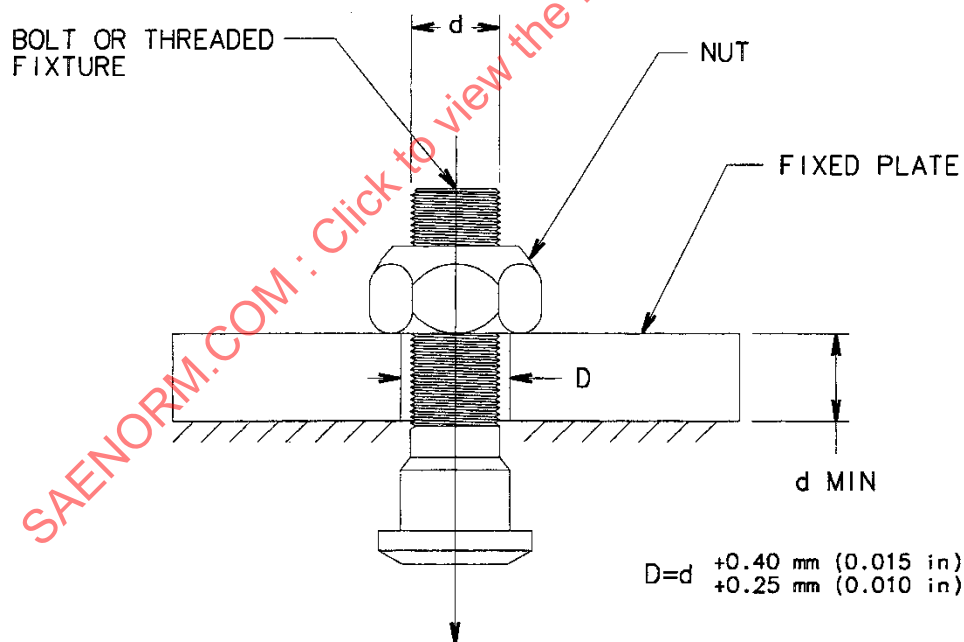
Single and outer ball seat or rim clamp nut proof load test method
